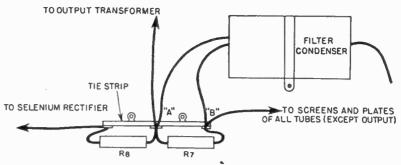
Assembly of R7 and R8 on tie strip.
